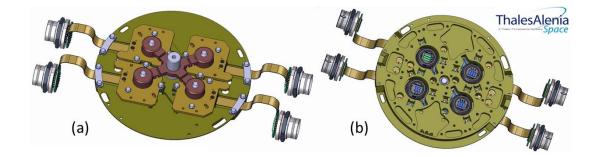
The four FCI NIR/IR detection assemblies are integrated on a cold plate inside the cryostat assembly, and cooled down at 60K operational temperature. (a) Bottom view of the assembly on cold plate, with cooling braid. (b) Top view of the assembly on cold plate, above which the cold optics will be integrated.
